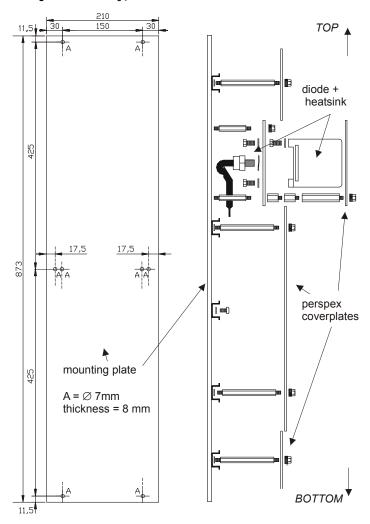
Mounting plan and measurements of the FS-FEEDER-48R
